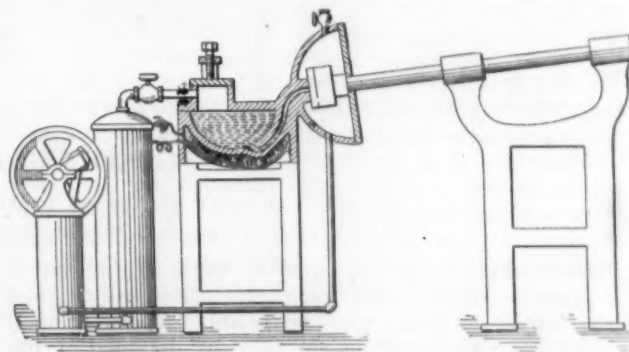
MACHINE WITH DIE ENCLOSED IN VACUUM CHAMBER.
